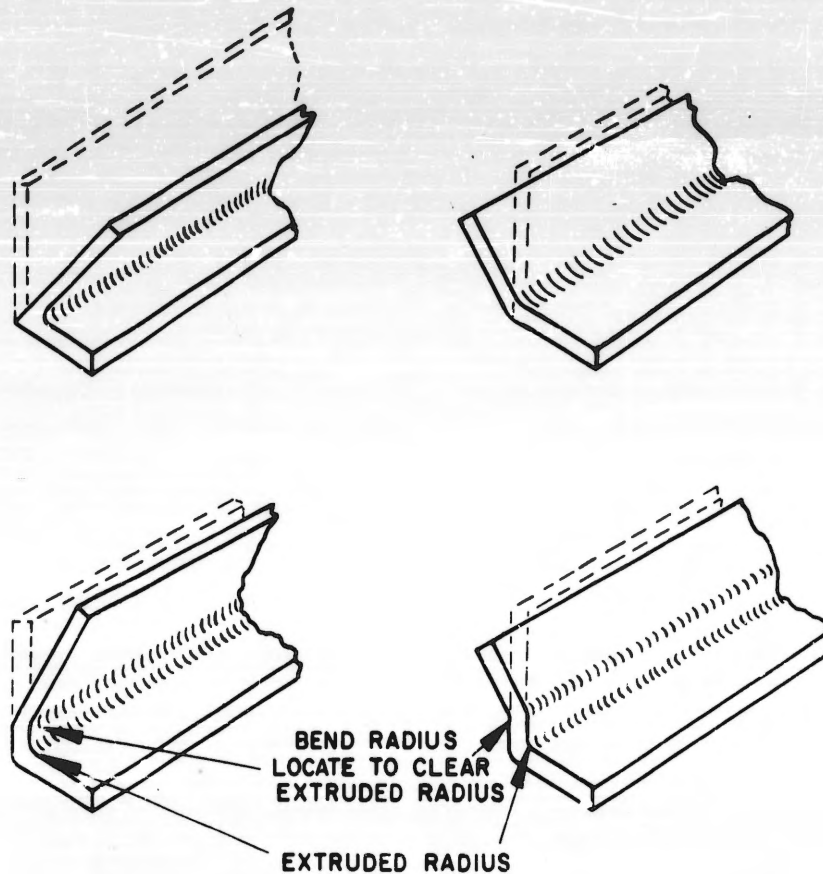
Design Considerations for Stretch Forming Extruded Sections
